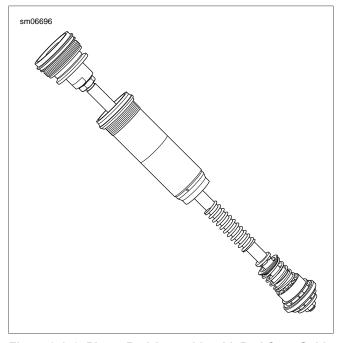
Piston Rod Assembly with Rod Case Guide
